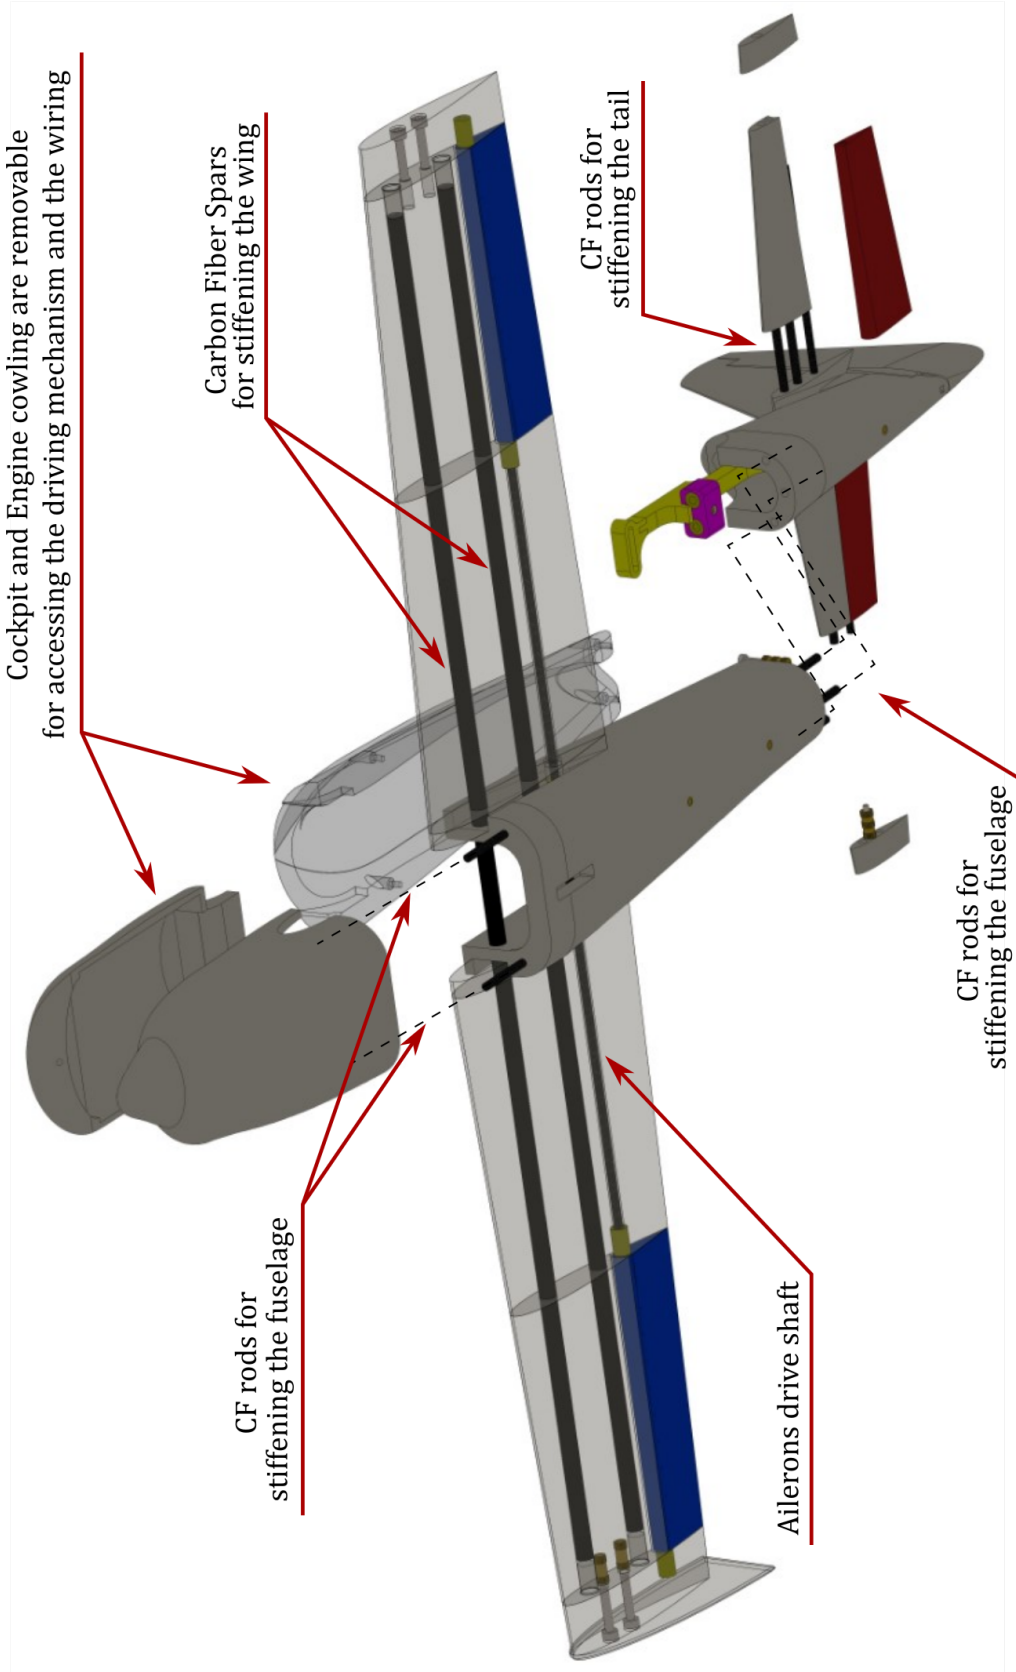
Exploded view showing the airplane components the internal reinforcing structure.
